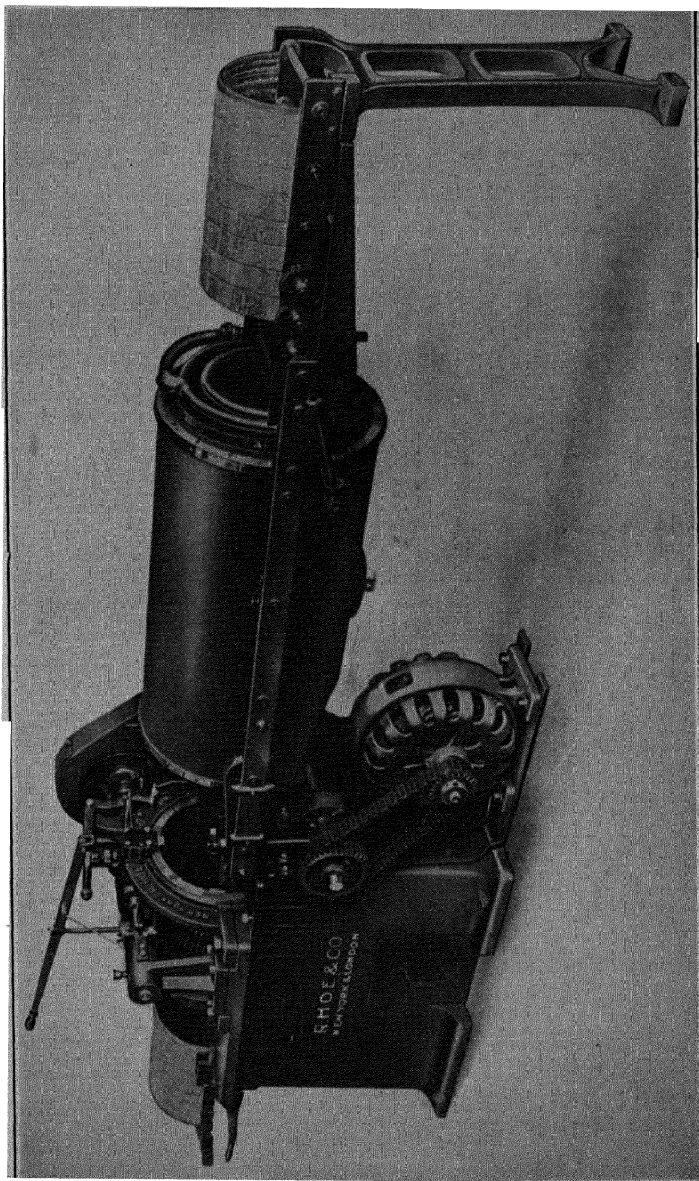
Curved Stereotype Plate-Finishing Machine
